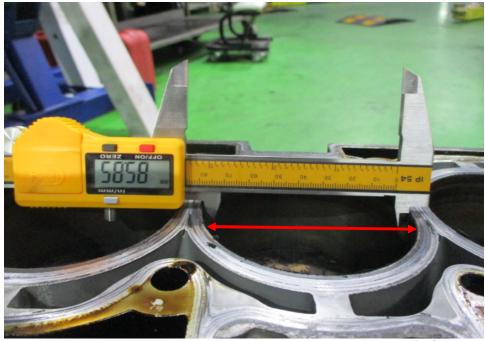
shows measurement being carried out to the bore (arrowed) of cylinder 2 of the Mitsubishi engine. The bore measurement of cylinder 2 was recorded to be 85.87mm.
